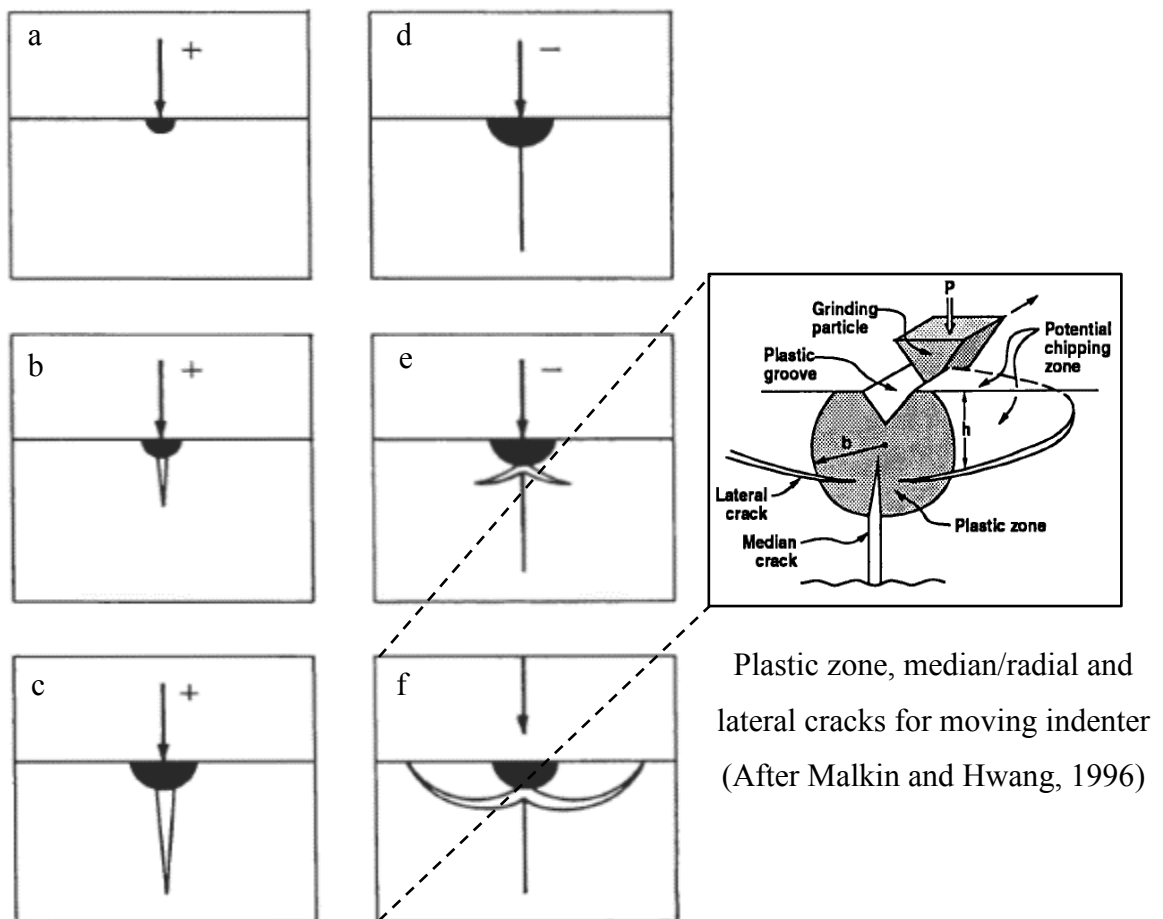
Schematic of crack formation under point indentation; + denotes loading, - denotes unloading (Adapted from Lawn and Swain 1975)
